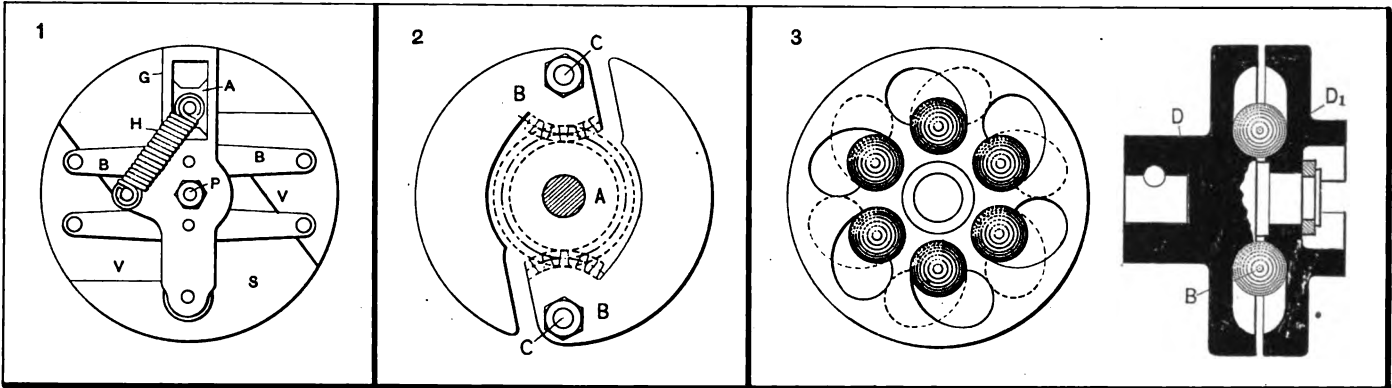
Timing the break of primary current Fig. 2.—Turning armature by swinging weights Fig. 3.—Curved sockets in multiple ball coupling of the Ruthardt Magneto
